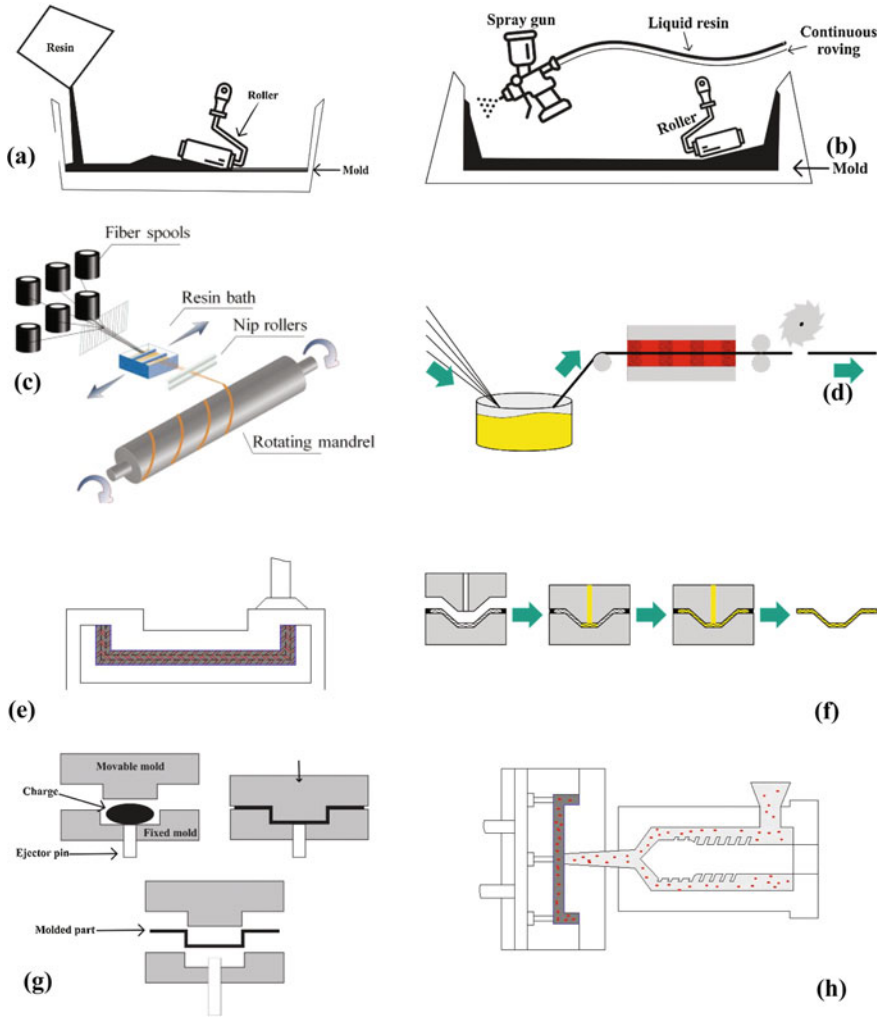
Traditional fabrication techniques for composite structures [1, 24, 26] a hand lay-up, b spray lay-up, c filament winding, d pultrusion, e vacuum bag, f resin transfer molding, g compression molding, h injection molding
